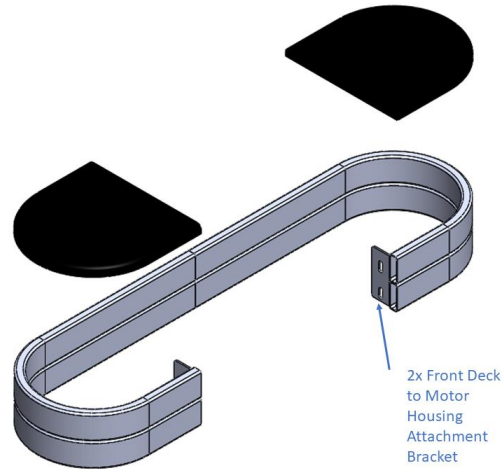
Front Deck Exploded View Showing Mounting Brackets
